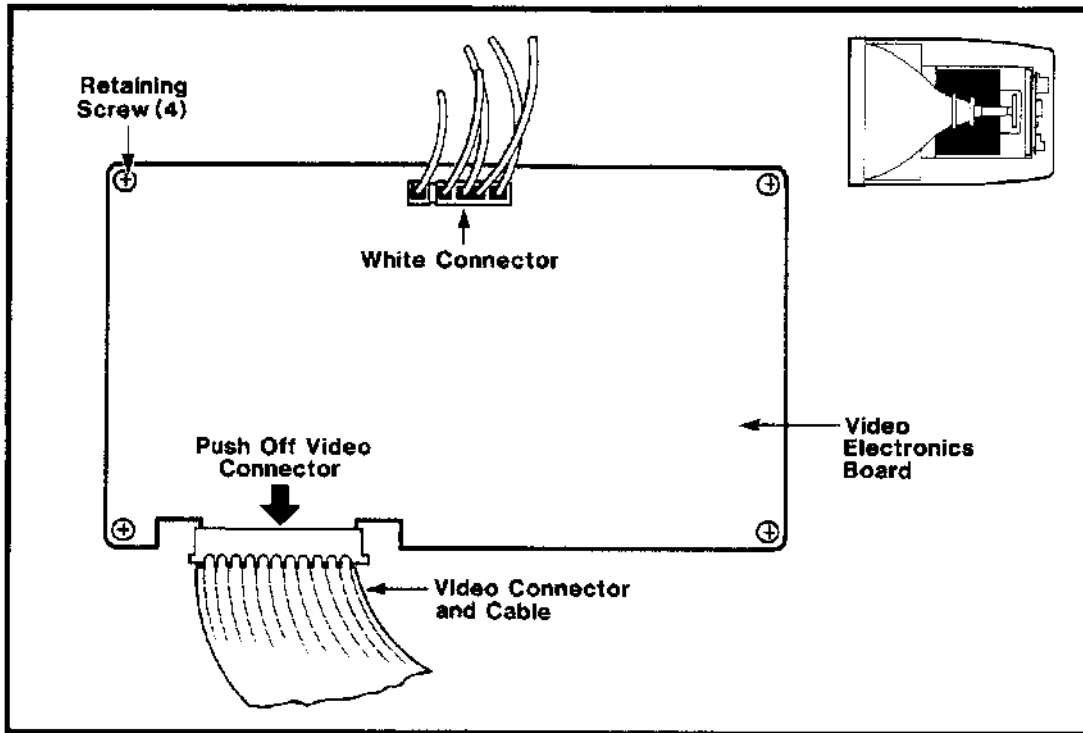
REMOVING THE VIDEO BOARD CONNECTORS
